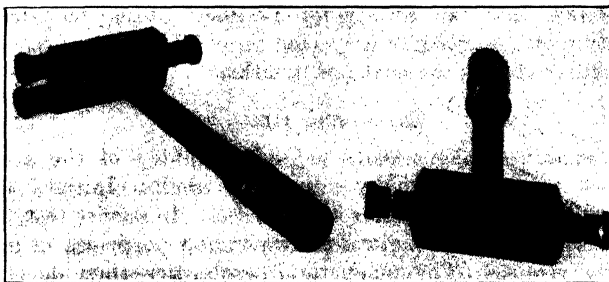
TEST COIL AND MOUNTING SUITABLE FOR A SMALL ROD OF DRILL STEEL.
